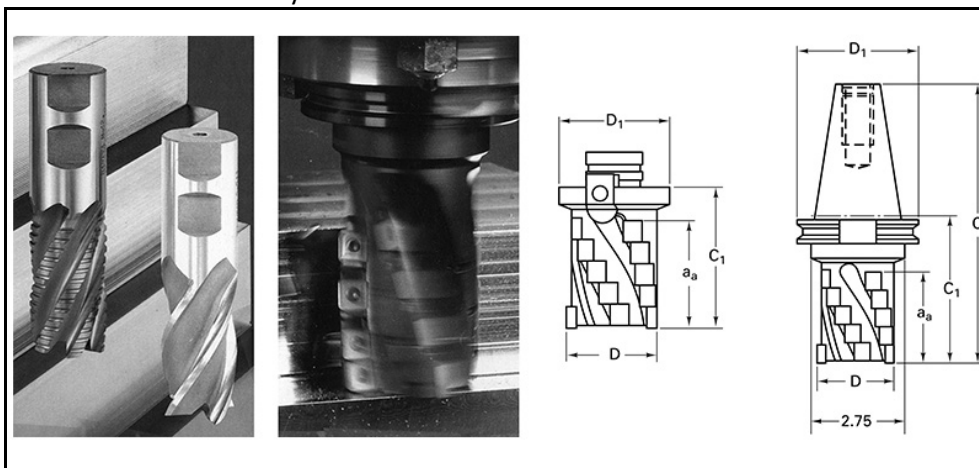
FIGURE Solid end mills are often coated. Insert tooling end mills come in a variety of sizes and are mounted on taper shanks.
